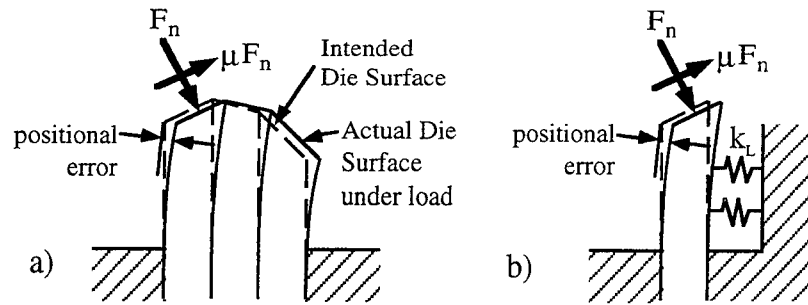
a) Group of die laminations subjected to forming loads and b) modeled as cantilevered Euler beams in a parallel configuration
